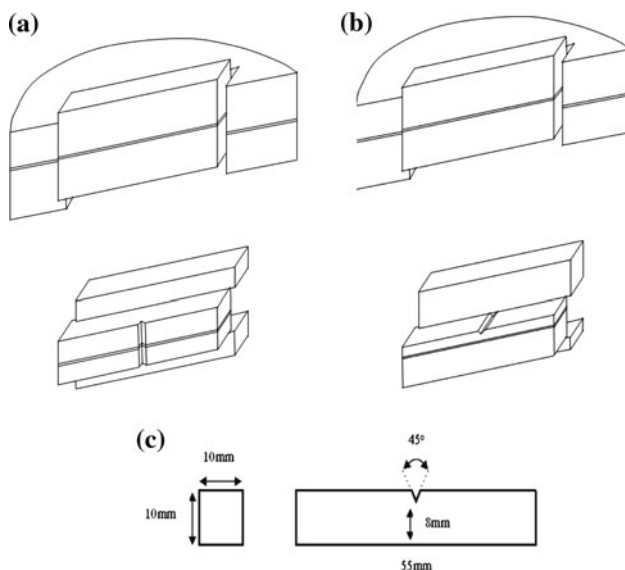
Schematic representation of Charpy impact specimens' preparation in a crack divider, b crack arrester configurations, and c dimensions of Charpy impact specimen
